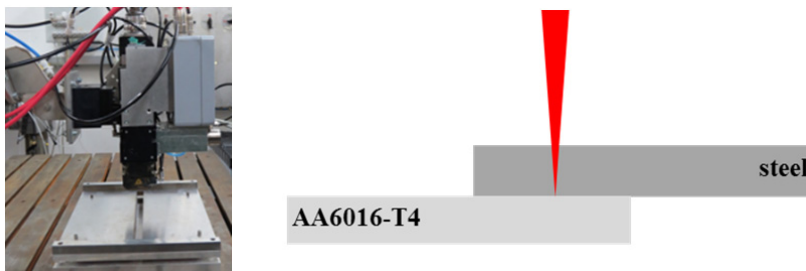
Experimental setup for the laser beam welding of different dissimilar lap welds of steel and aluminum alloys (steel-sided irradiation).
